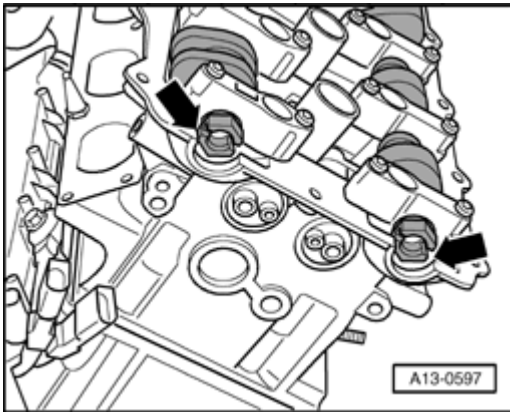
Rotating Inner Part And Outer Part Of Both Camshaft Adjusters Against Each Other Up To Lock Position
